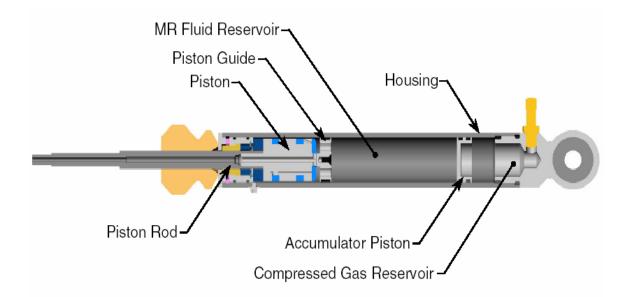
Schematic representation of a mono tube MR damper [12] The twin tube MR damper however, has two chambers of fluid, one is inside of another. Schematic representation of twin tube MR damper is shown in Figure 1.4. The inner housing and the outer housing of the damper are separated by a foot valve. The piston rod assembly is guided by the inner housing of the damper in the same manner as in case of mono tube damper. Inner reservoir space is the volume bounded by the inner housing of the damper. Similarly, outer reservoir space is the volume that is enclosed between the inner and the outer housing of the damper. The inner reservoir of the damper is installed with MR fluid is installed in the inner reservoir to avoid occurrence of air pockets.
